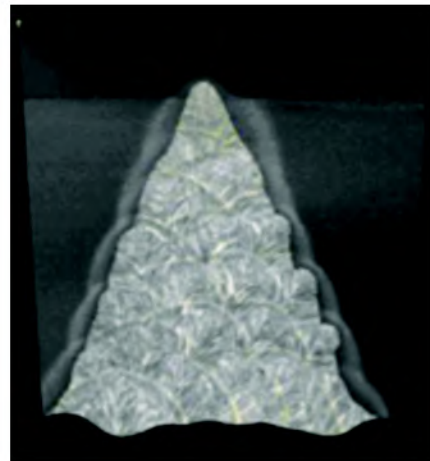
A 1-in.-thick weld accomplished with T-GMAW in the overhead (4G) position.
